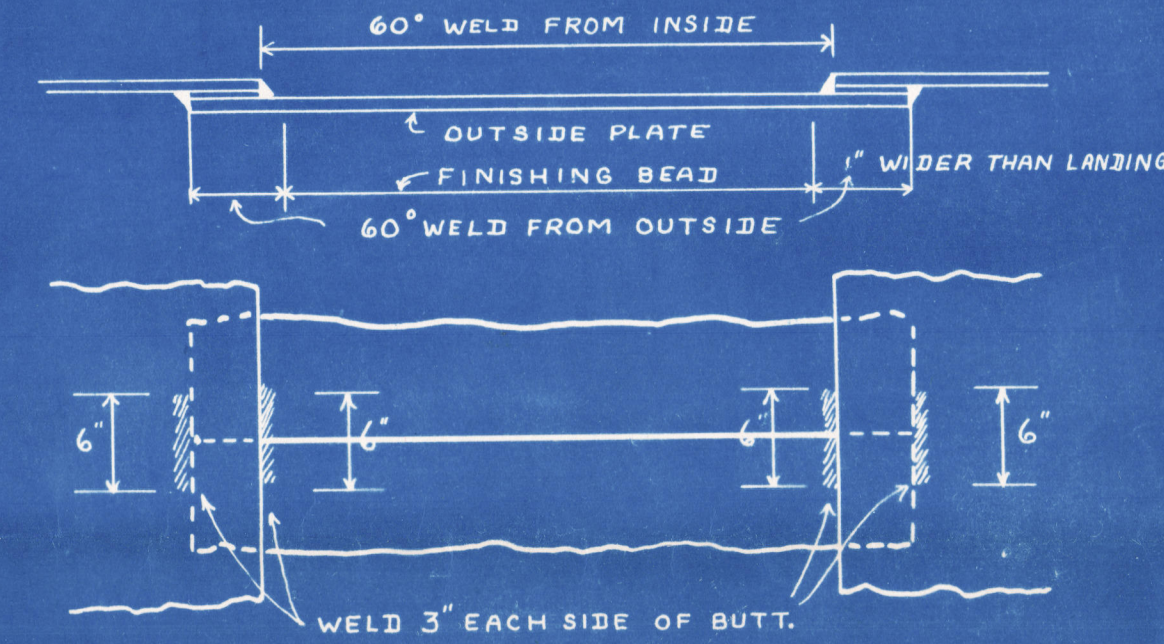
PLATES TO BE VEE'D OUT TO A 60° INCLUDED ANGLE FOR ALL BUTT WELDS AND BEVELLED TO WITHIN 1/8" FROM BOTTOM PLATE. GAP OF 1/8" TO BE KEPT BETWEEN EDGES TO BE WELDED
